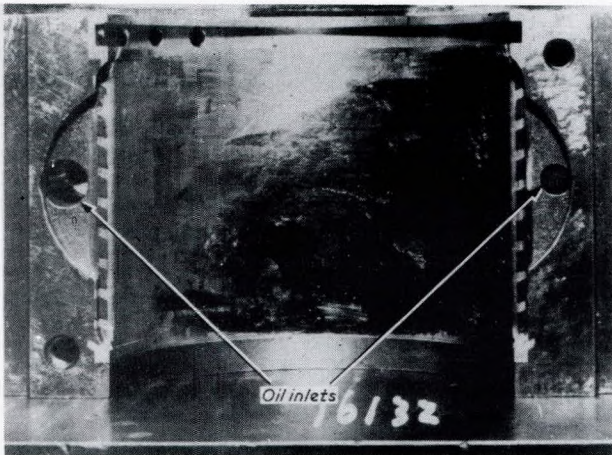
Primary pinion two-inlet, thick shell bearing failure
